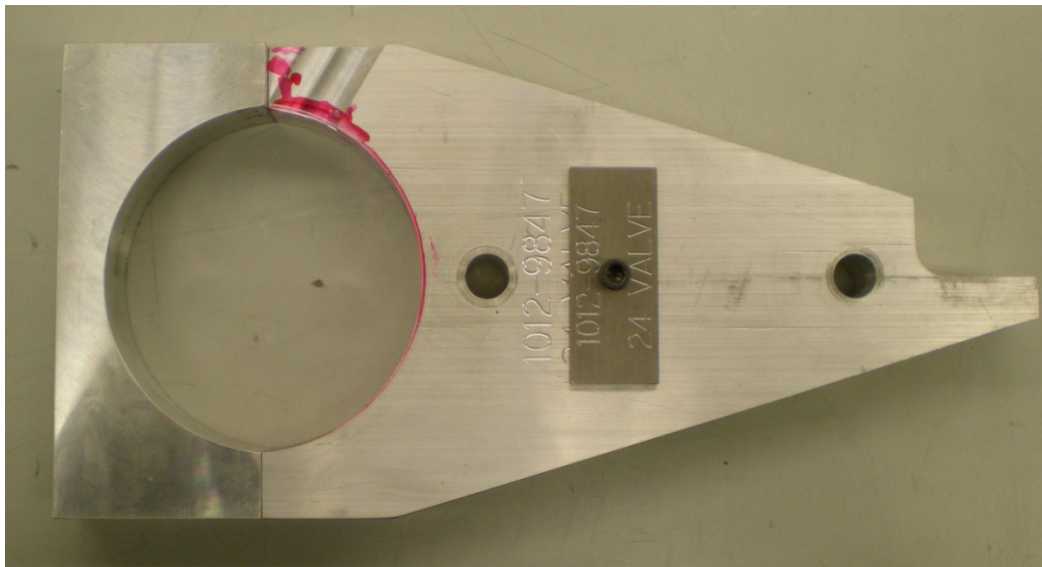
TOV Rigging Tool with Extender Block (Not Installed)
